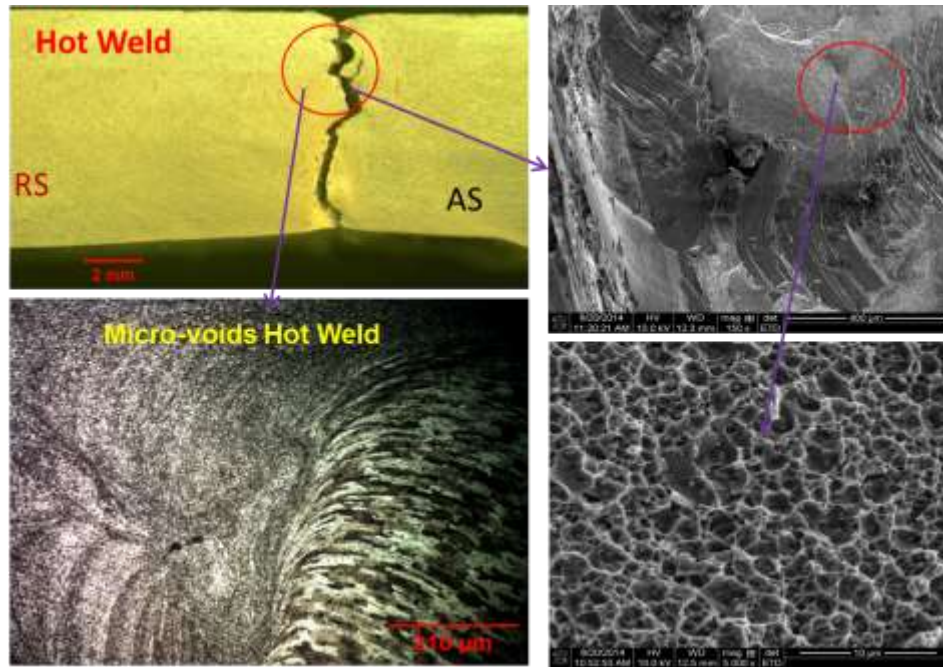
Hot weld showing an IV. Fracture is on the AS of the tool inside the SZ. Fracture surface exhibits equiaxed ductile fracture dimples, smaller corresponding to base material. Unbonded void surface exhibits some regularly space curved lines that may be internal ripples.
